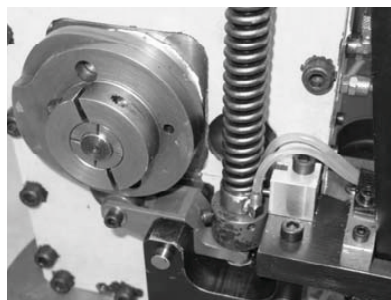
Exhaust valve cam, rocker arm, valve spring and valve rod water cooling pipes.
